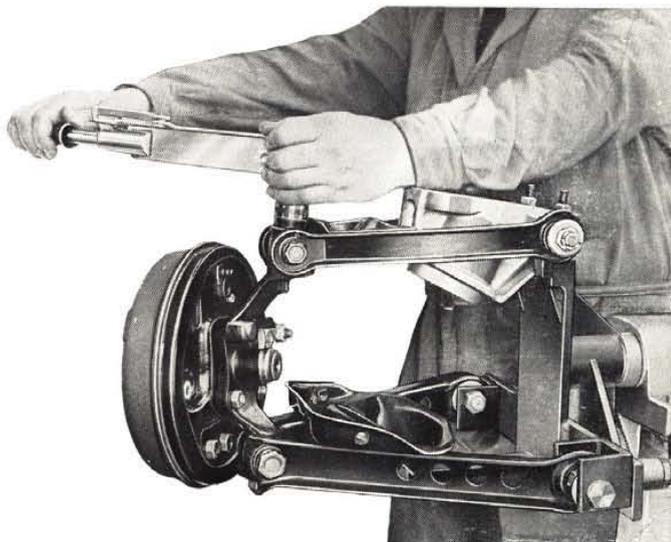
Tightening kingpin screw to upper control arm with unit on fixture A. 22229.
